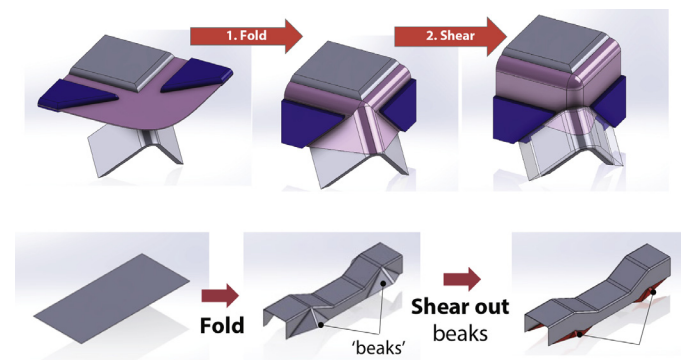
The folding shearing process for forming deep-formed parts in sheet metal without use of a blank holder (adapted from [49]).
